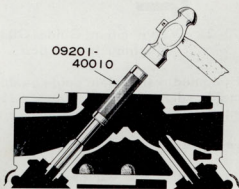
Valve Stem Guide Bushing Removal G0312
